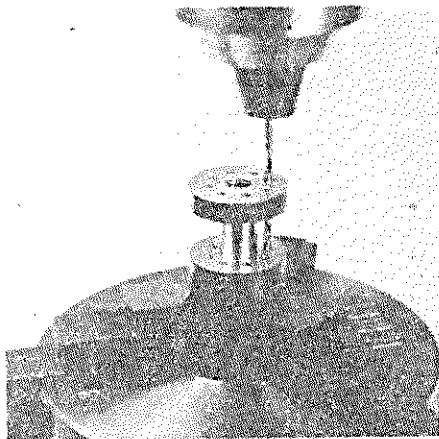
Drilling the second set of holes in the bottom flange after extending the drill from the chuck
